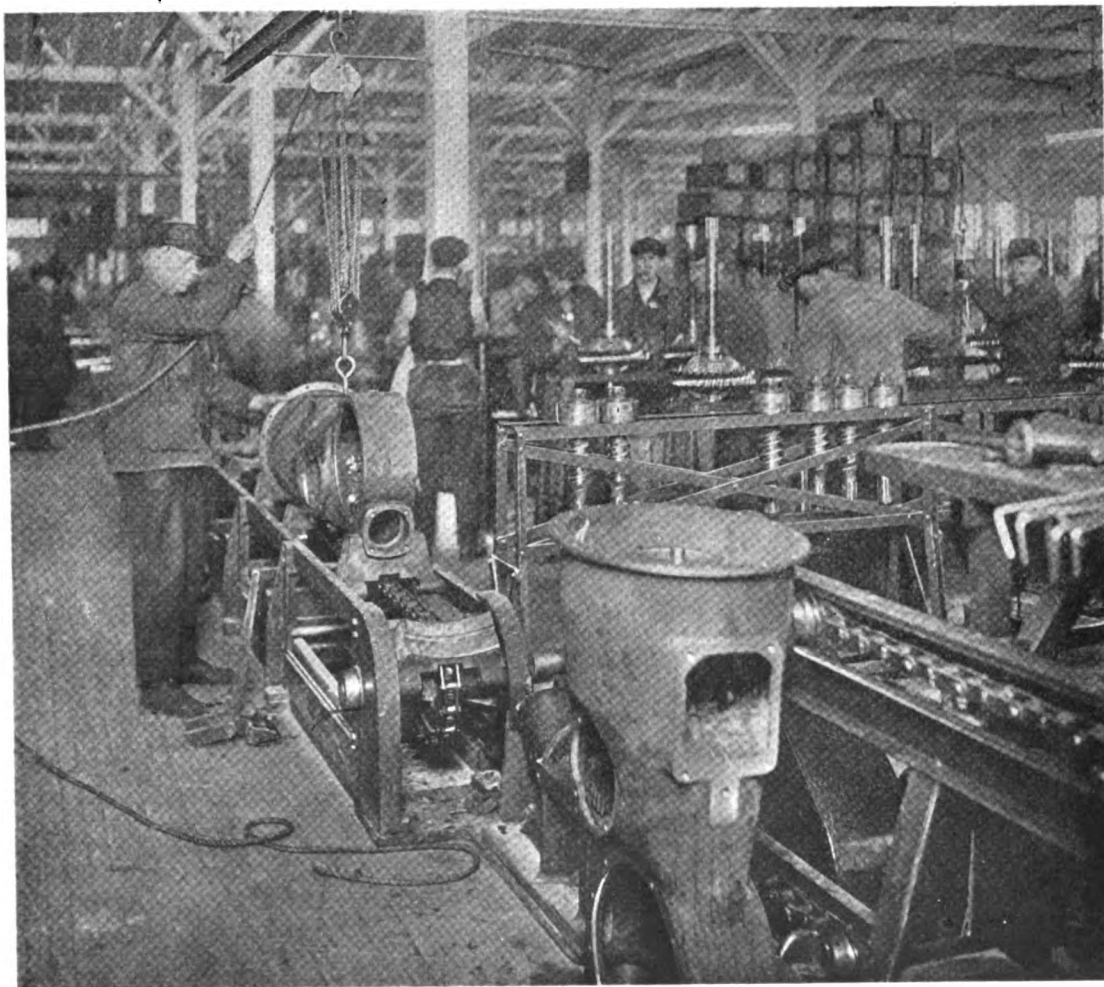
When the first assembly operations are complete, with the transmission housing in a vertical position, they turn over horizontally to the next section of the transmission assembly chain. This view shows the housing just about ready to turn over, and one is turned over in the background. Also in the background can be seen the preliminary sub-assemblies on the worm shaft and rear axle
